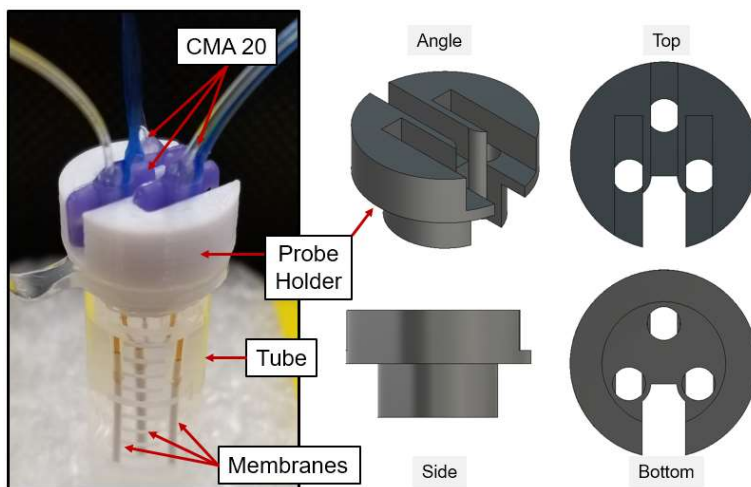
3D printed  $\mu$ D probe holder for 2 mL centrifuge tubes.
